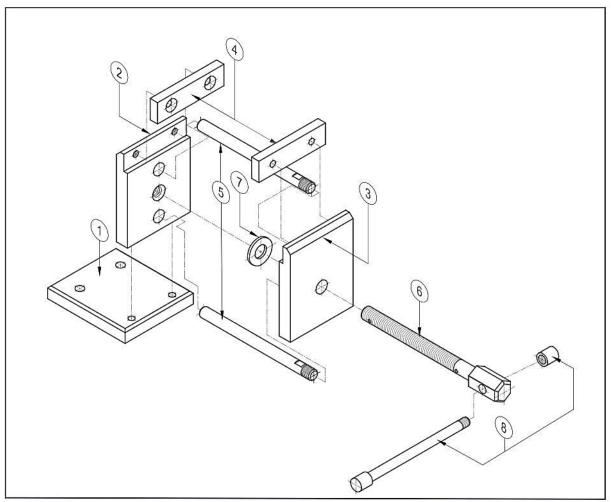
EXPLODED ISOMETRIC DRAWING
